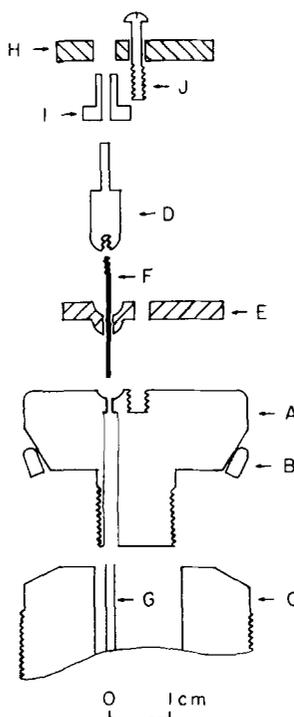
High-pressure vessel unsupported area seal (A-C) and exploded view of one high-pressure electrical feedthrough (D-J).
